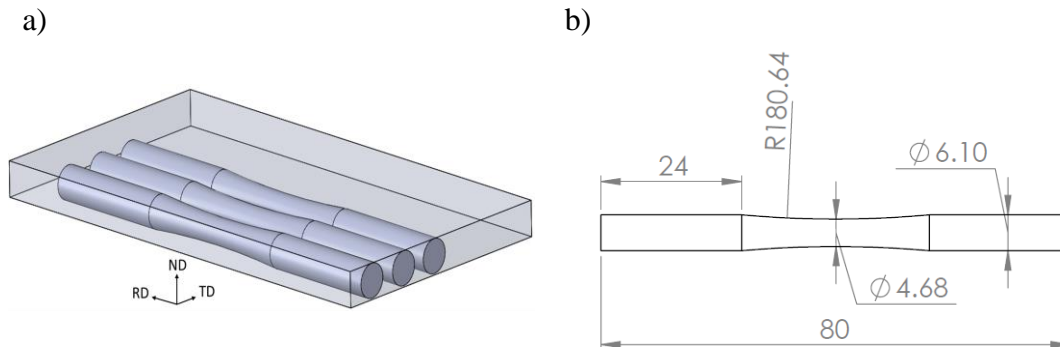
Machining of rotating bending samples, a) sample machining from a rolled sheet, b) drawing of the samples
